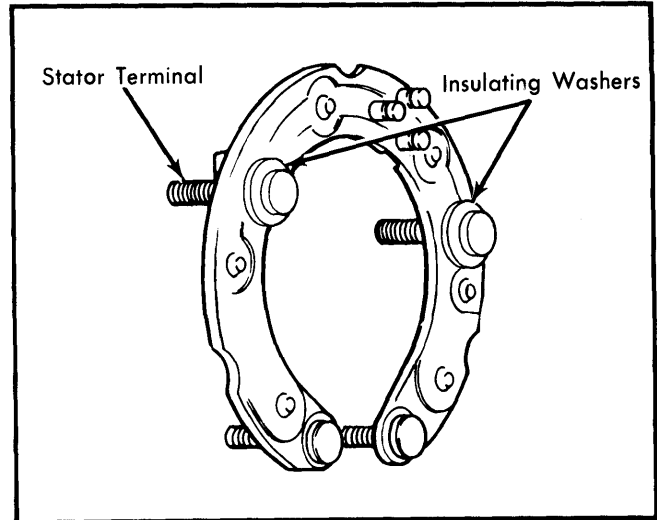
Flat Type Rectifier Assembly (With Built-in Diodes)
